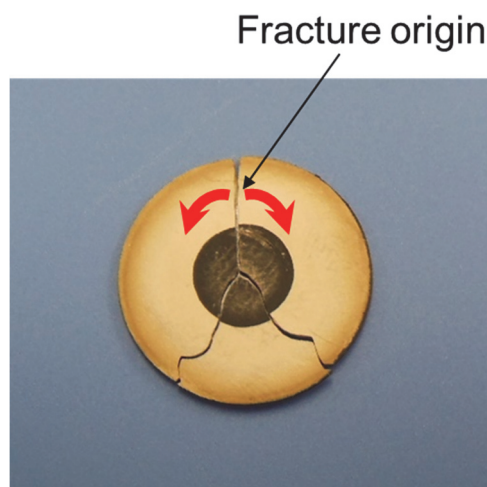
Fractured disk specimen after thermal shock test (perpendicular)
